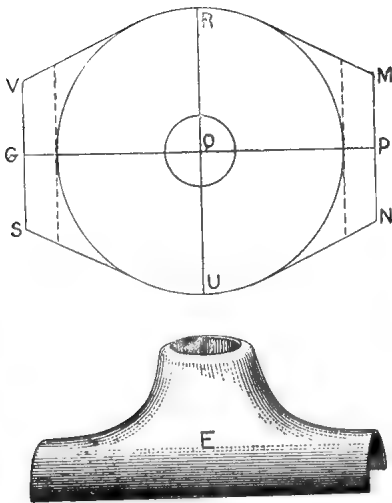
Method of Obtaining Pattern for One-Half of Four-Way Piece E.
